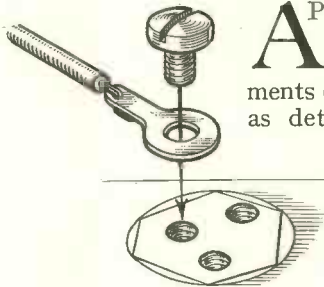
A TAG SOLDERED TO GLAZITE WIRE.
